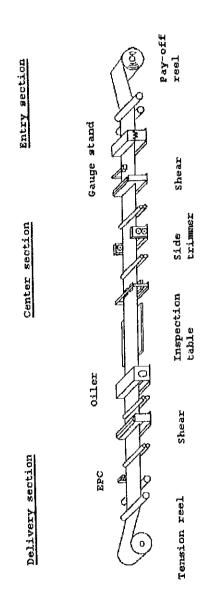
RCL Arrangement (Reference Drawing)
